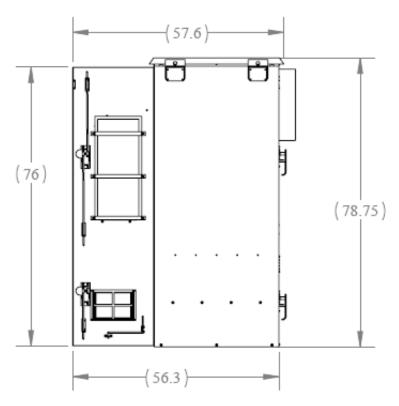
RIGHT SIDE VIEW OF THE LTEE-OD
